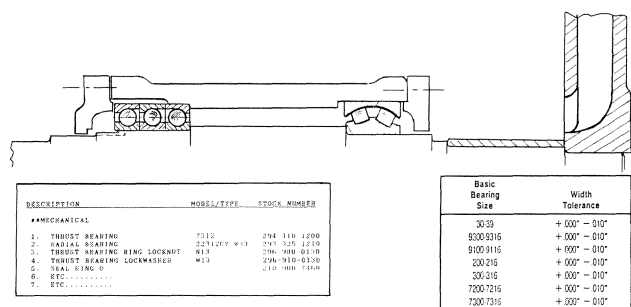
Bearing Housing Showing Ball Thrust Bearings Which Failed Frequently.
